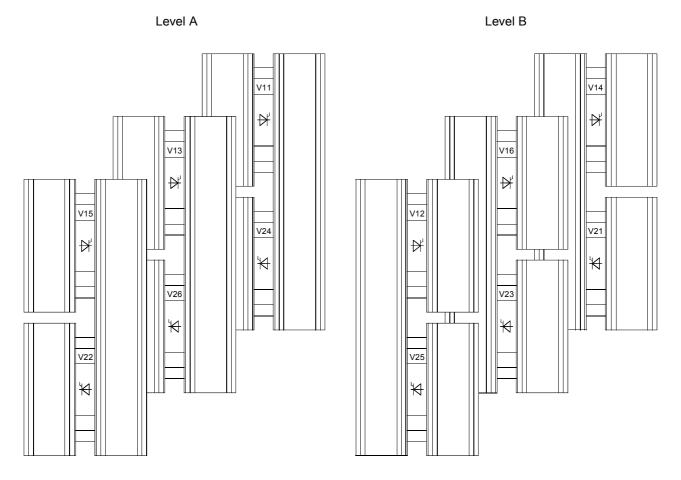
Arrangement of the thyristor blocks, view from right-hand side of unit, Size K (see dimension drawing in Section 2.4)
